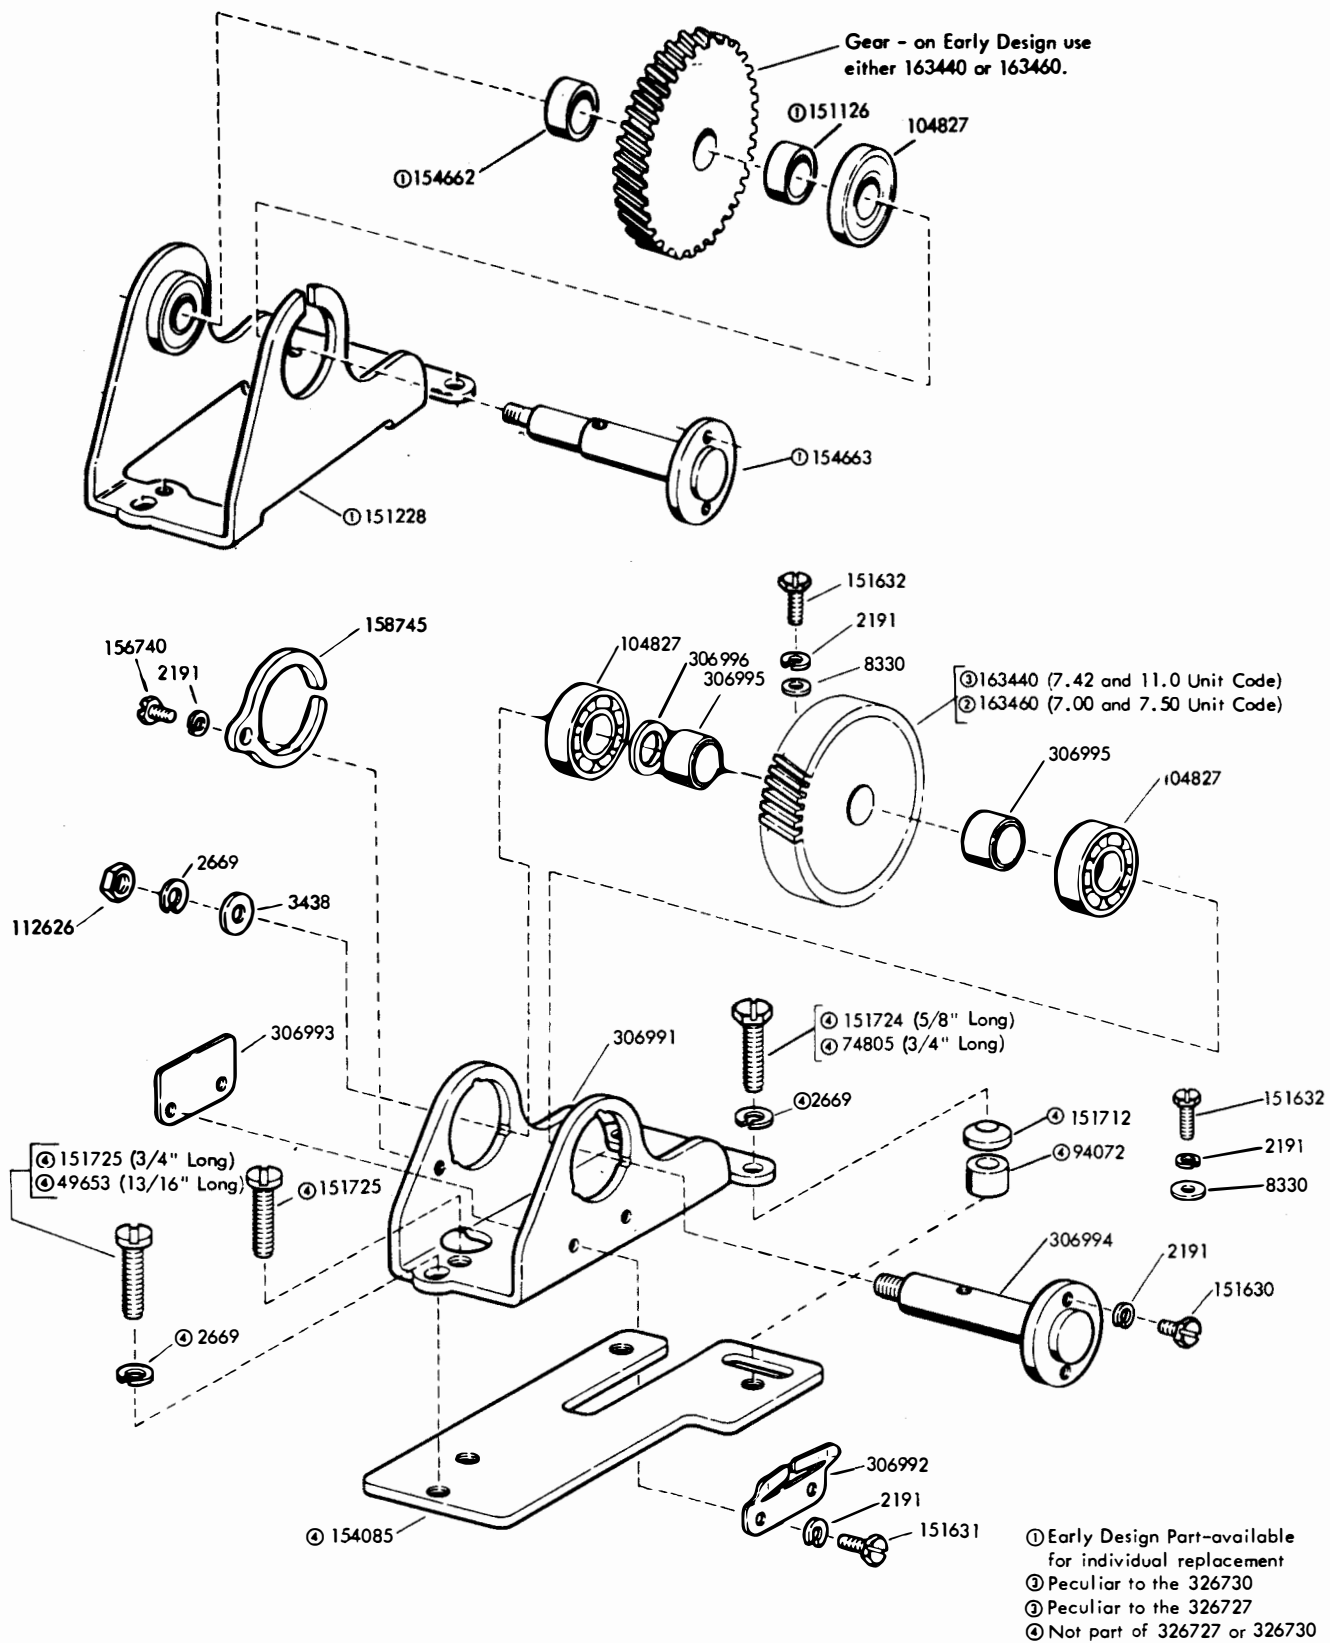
Intermediate Gear Assemblies 326727 and 326730
